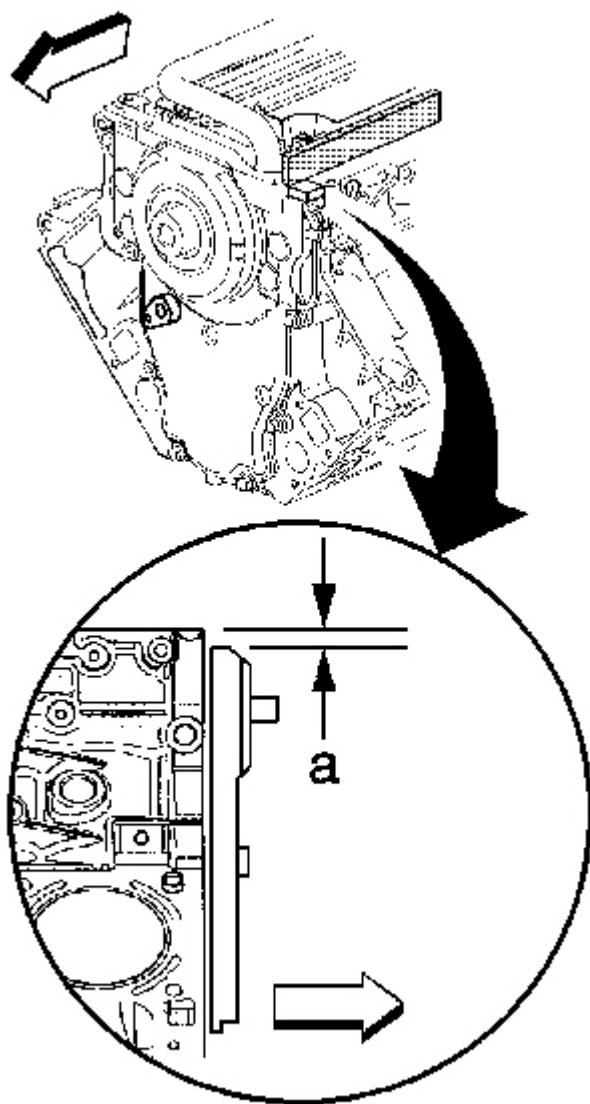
Measuring Oil Pan Surface Flatness & Front Cover-To-Engine Block
